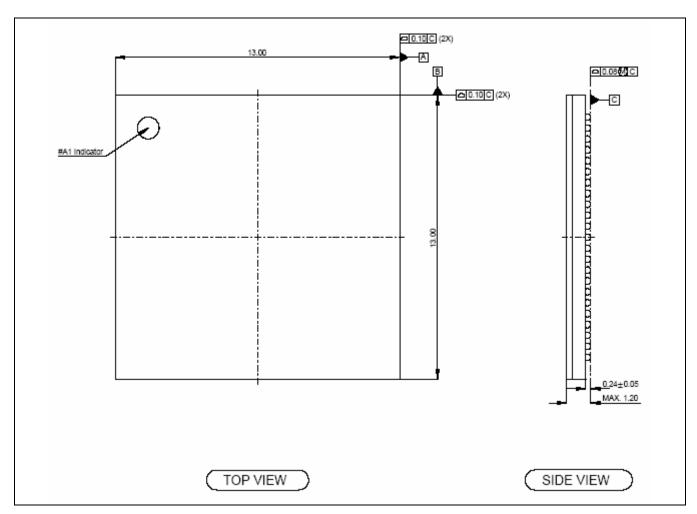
400-FBGA-1313 Package Dimension 1 (Top View)
